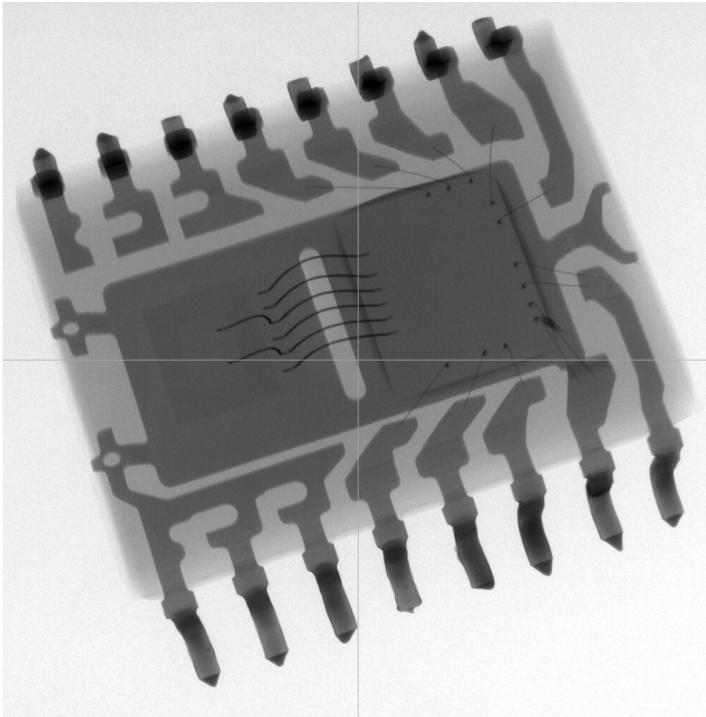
X-ray view of wire bonding inside the MEMS integrated accelerometer
